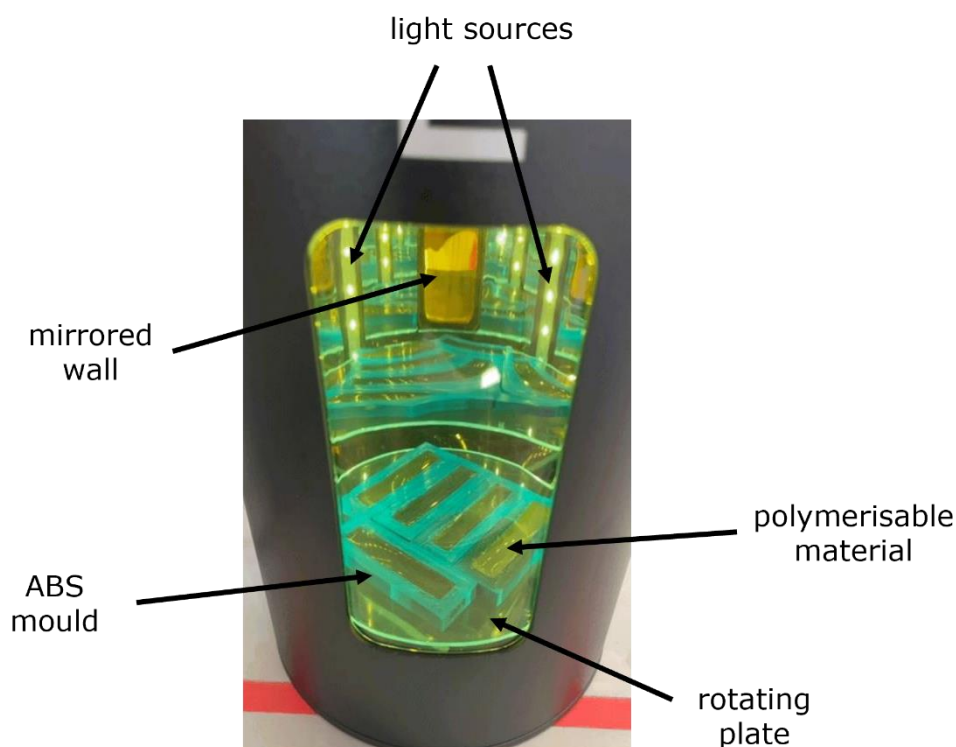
| ELEGOO Mercury Curing Machine, 25 W 405 nm UV lamp with gel samples in ABS material moulds.
